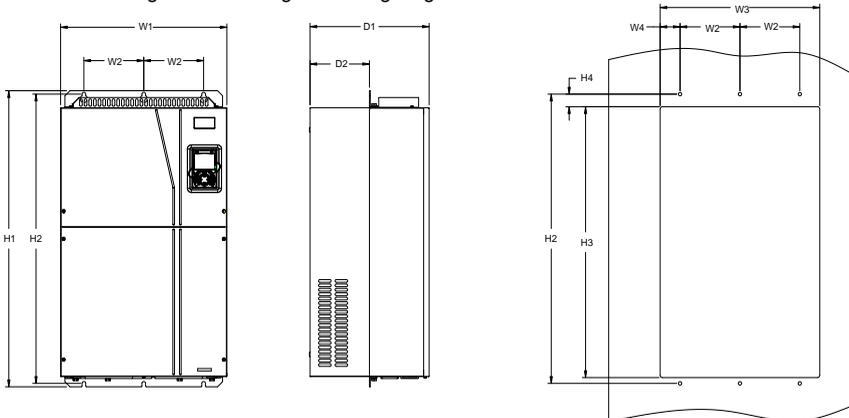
Flange mounting diagram for 380V 132–200kW models
